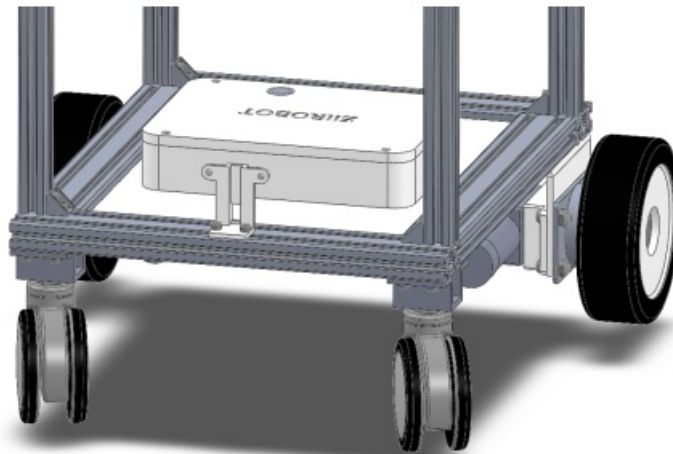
Fix the Camera Frame on the Front Aluminum Extrusion
